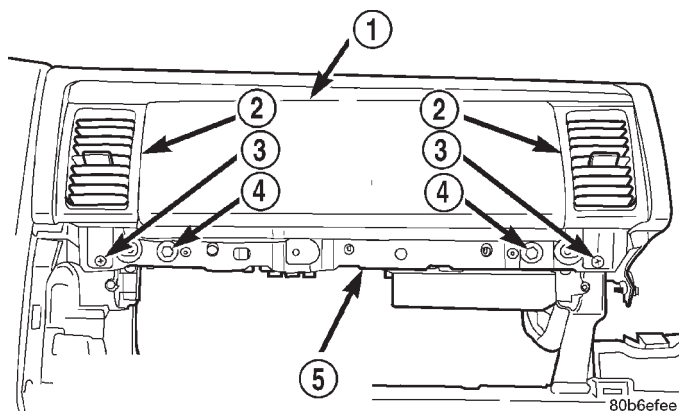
Instrument Panel Top Pad to Glove Box Opening Mounting
